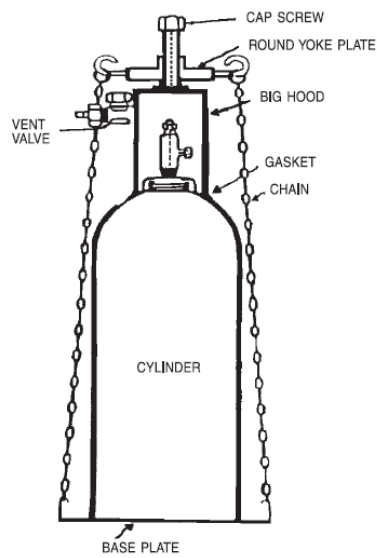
CYLINDER VALVE HOOD ASSEMBLY DEVICE
